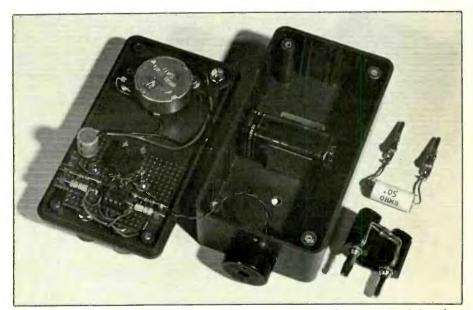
All components can be mounted and wired on perforated board that then mounts on front panel of enclosure.
